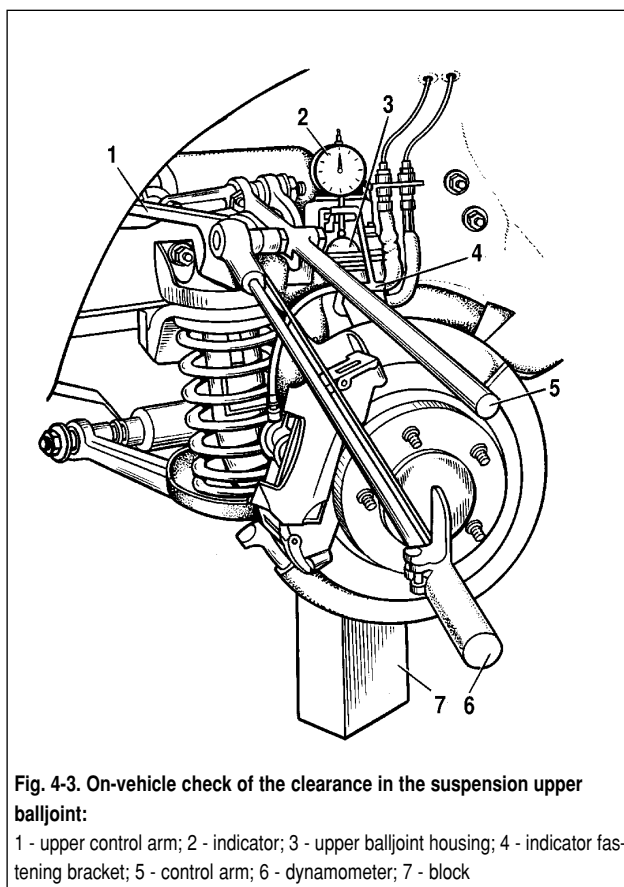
On-vehicle check of the clearance in the suspension upper balljoint:
